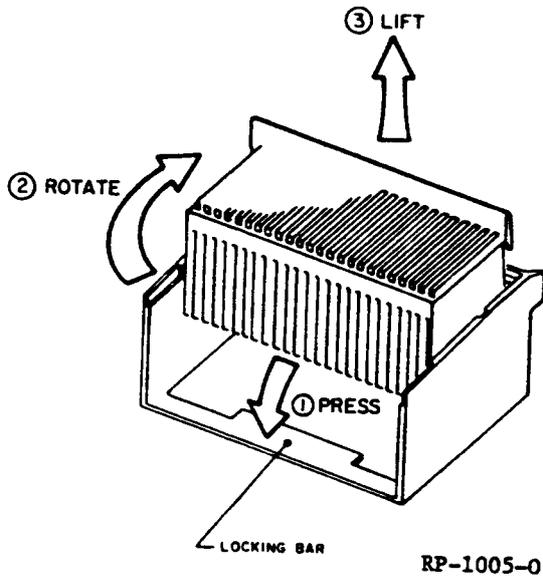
REMOVING THE BLOCK ASSEMBLY (PAR. 1.22)
